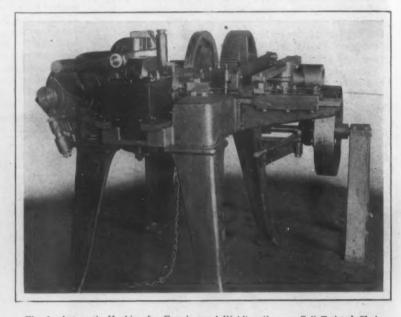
Automatic Machine for Forming and Welding German Coil Twisted Chain
